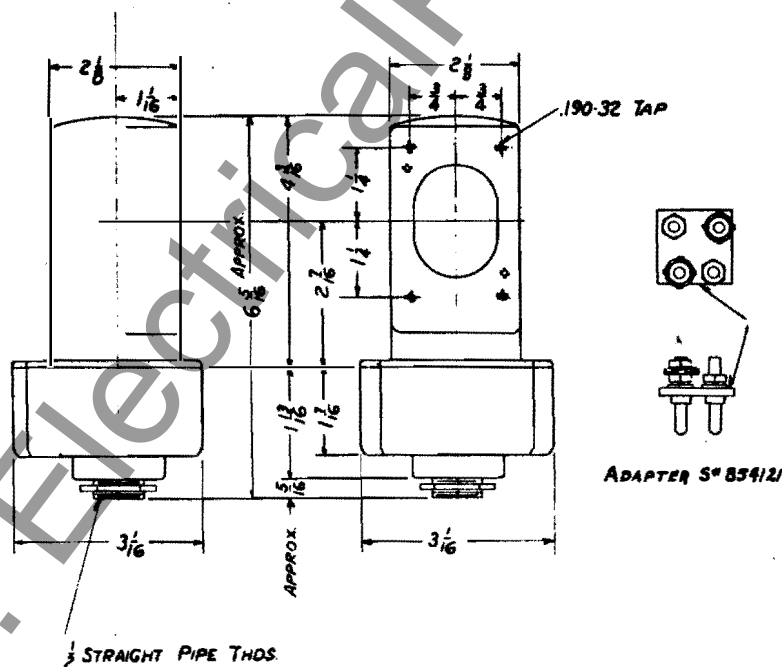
Outline Drawing for Phototube Housing with Adapter, Style No. 919821
